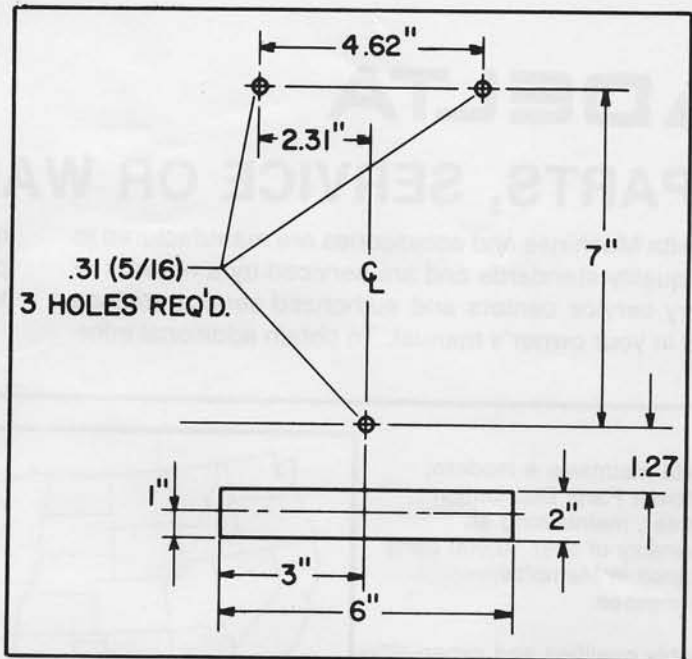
MOUNTING HOLES AND CABLE CLEARANCE SLOT FOR THE LVC STARTER ENCLOSURE
